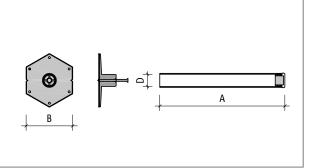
Schöck Dorn type LD Part A4, LD Part Zn: Dimensions of the dowel
